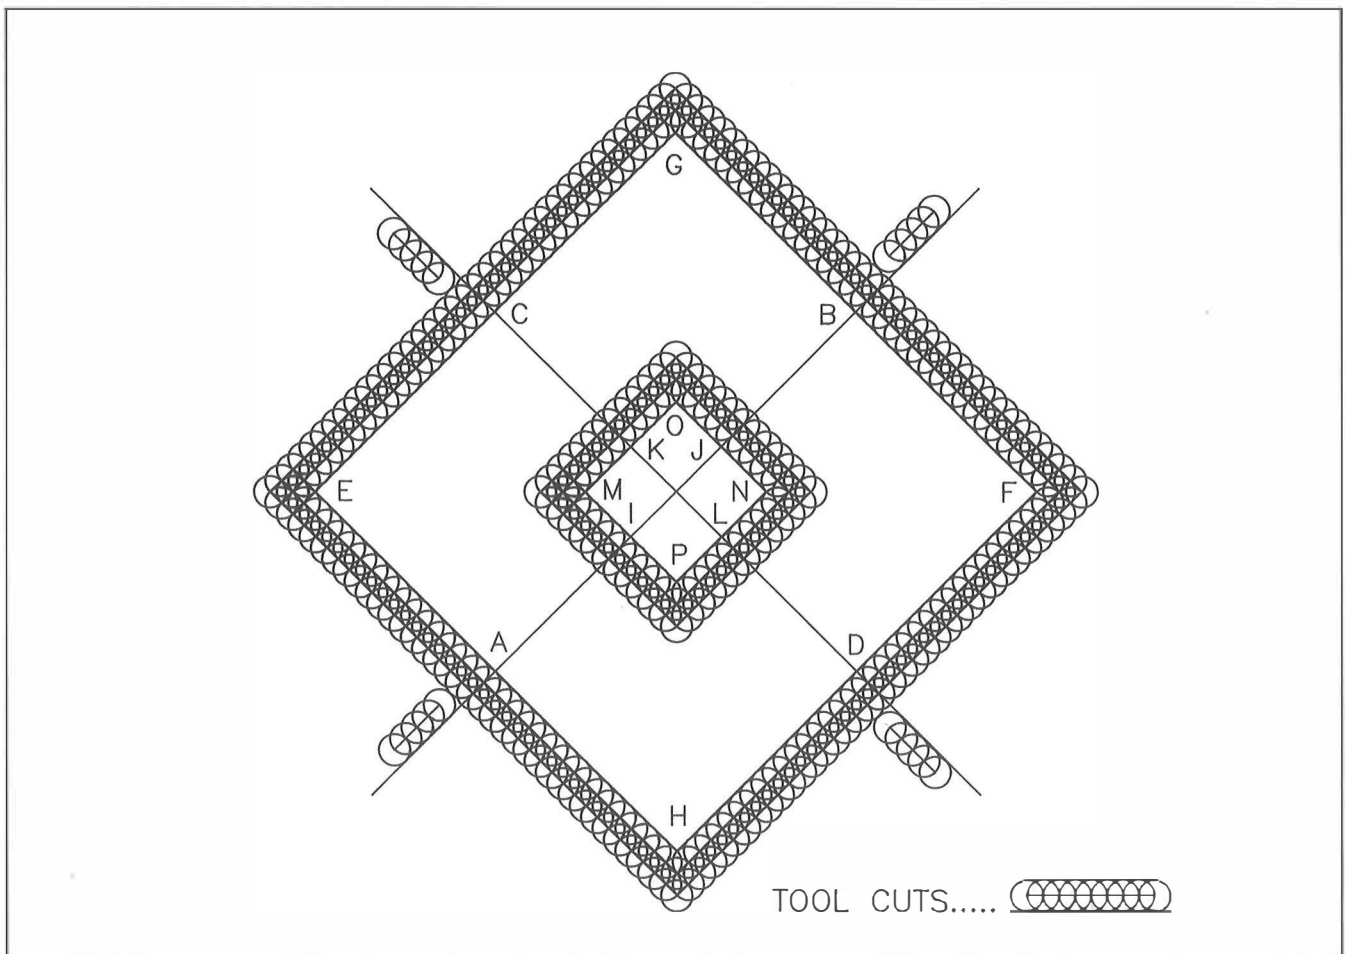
Drawing showing accuracy cuts in specified raw material and measurement points for both the 2-inch and 8-inch diamonds.
